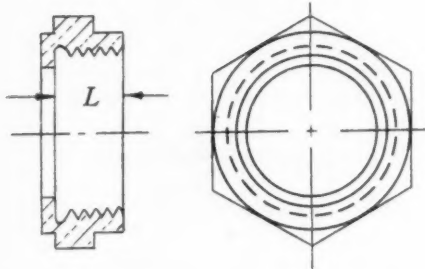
Coupling Nut for Use With Extra Strong Lead Flanged Pipe
